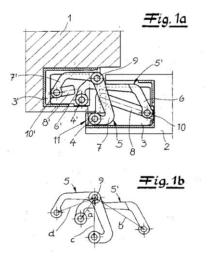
Five axes hinge design which enable setting two gaskets [4].
